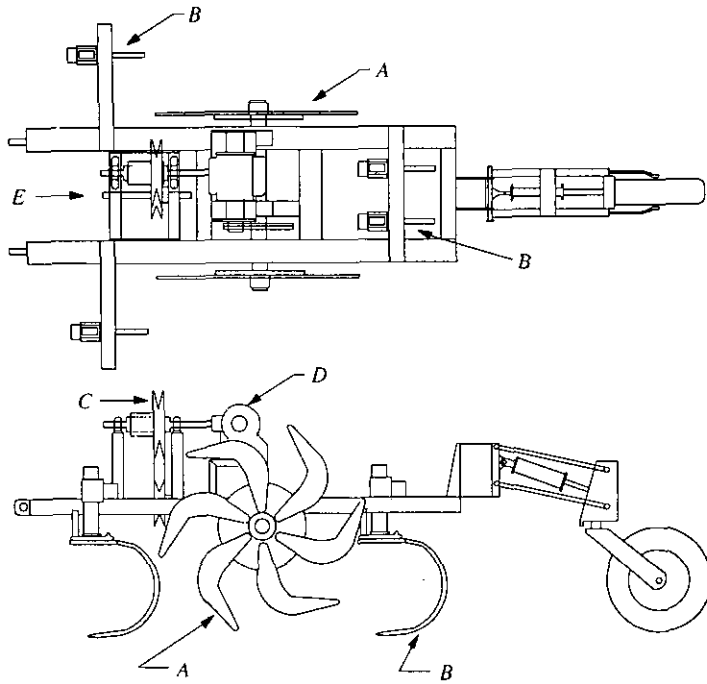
Scheme of active-passive tillage machine: A, active elements; B, passive elements; C, variable pitch V-belt drive; D, gearbox; E, pto input
